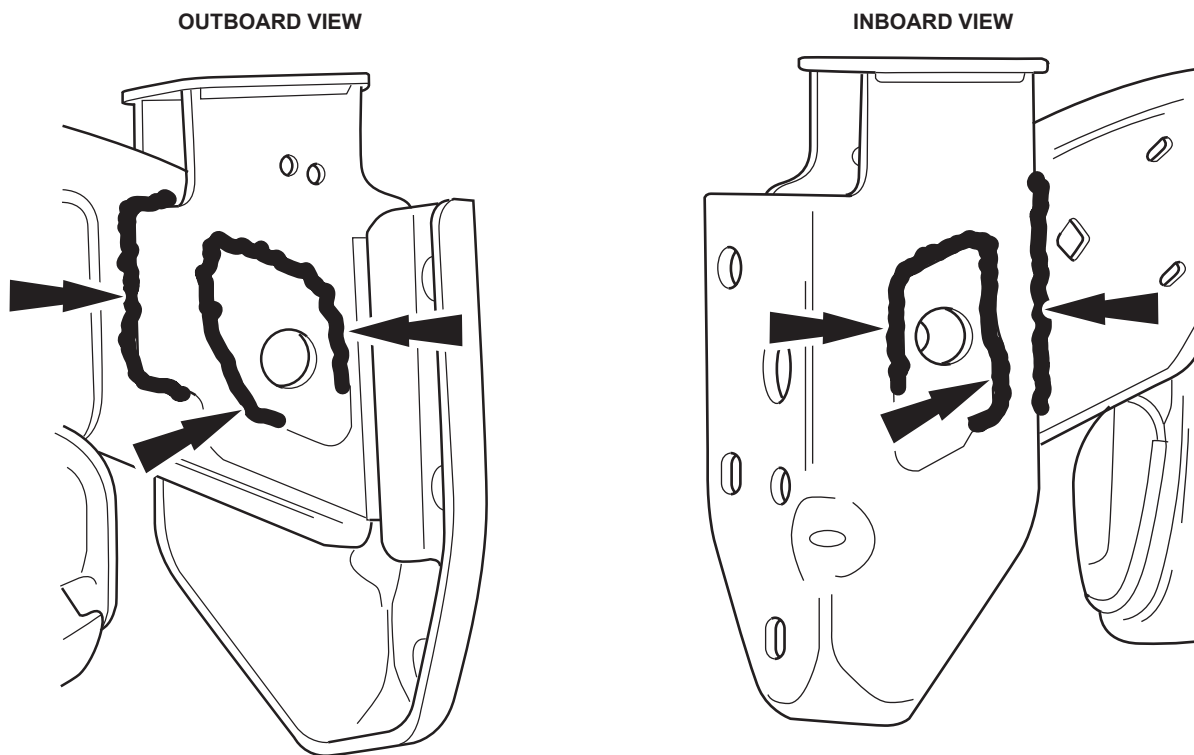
VIEW OF FRAME SHOWING REAR BUMPER BRACKETS INSTALLATION
